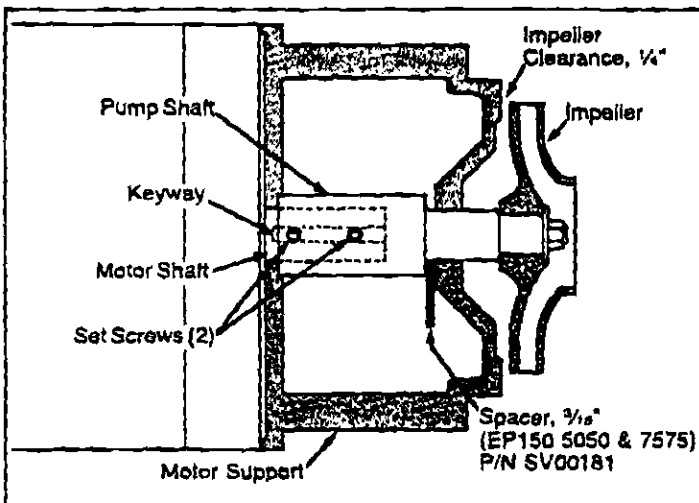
C: Pump assembly (EP150 5050 &amp; 7575)
